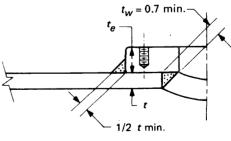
SOME ACCEPTABLE TYPES OF WELDS FOR FITTINGS, NOZZLES, AND OTHER CONNECTIONS TO SHELLS AND HEAD
